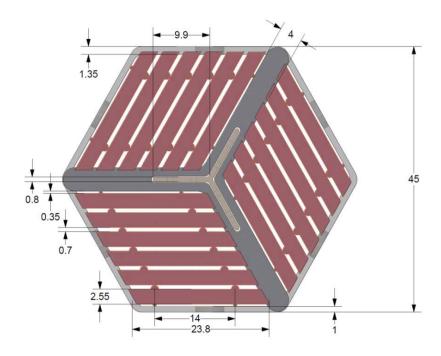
Cross section of the fuel assembly, Unit: cm (Varma et al., 2012)
